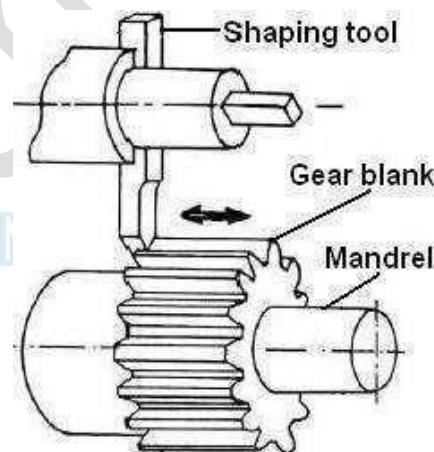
Gear teeth cutting in ordinary shaping machine
